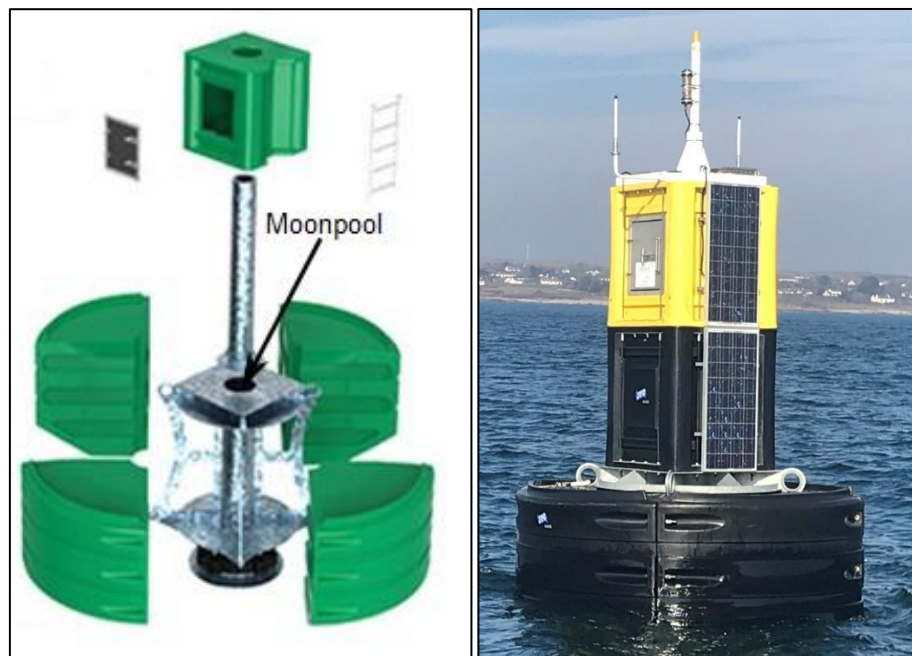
Exploded schematic of the Seagull buoy, [266] and assembled WASP full-scale prototype device
